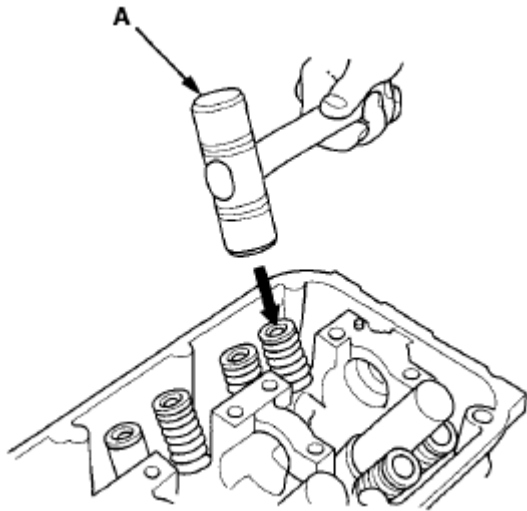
Tapping Valve Stem With Plastic Mallet To Ensure Proper Seating Of Valve And Valve Cotters
